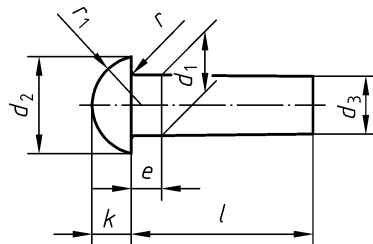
Dimensions of round head rivet (nominal diameters from 10 mm to 36 mm)
